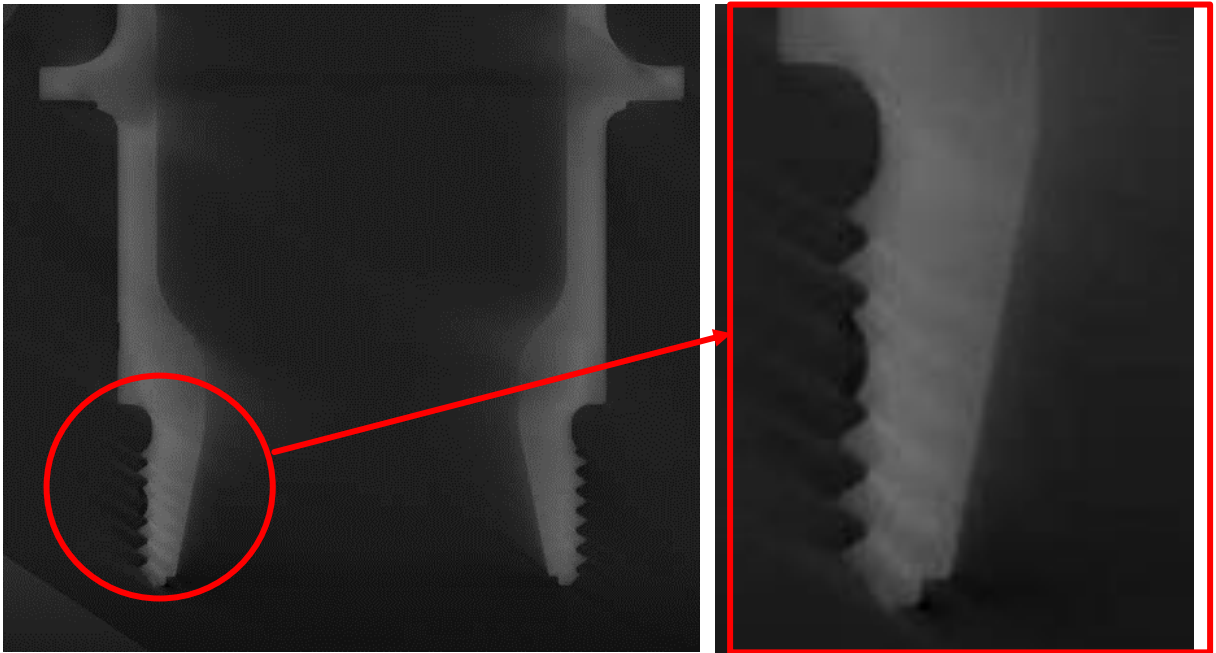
Place of imprint from the grub screw in an undamaged blade - no visible breakage
